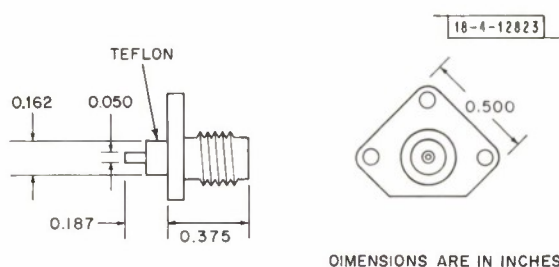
Configuration of OSM connectors used on switches. Metal inner and outer conductors are gold plated.
